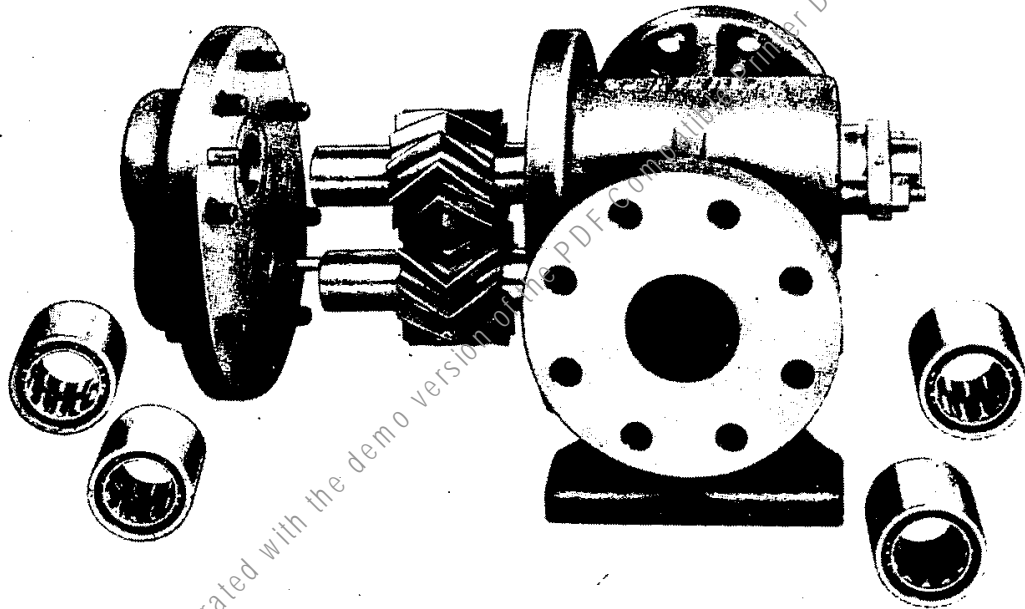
Helical-gear pump. (Courtesy Sier-Bath Gear and Pump Co.)
